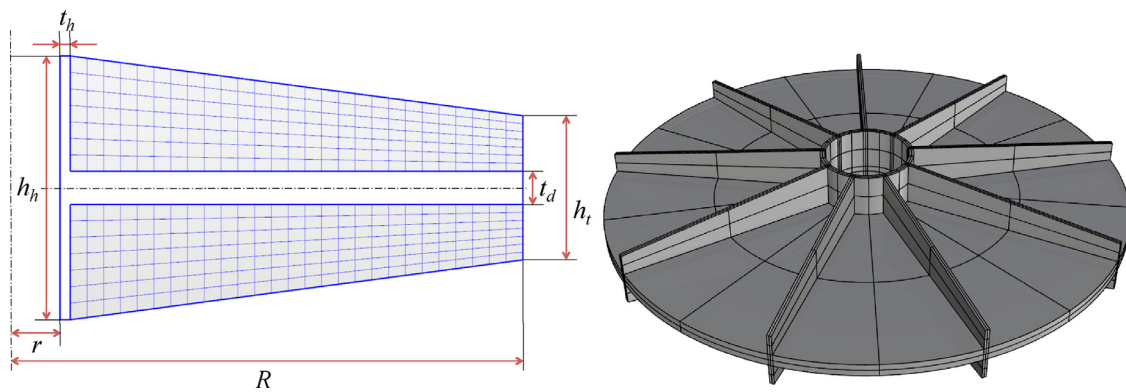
Left: rotor cross-section with dimensions. right: rotor solid model.
